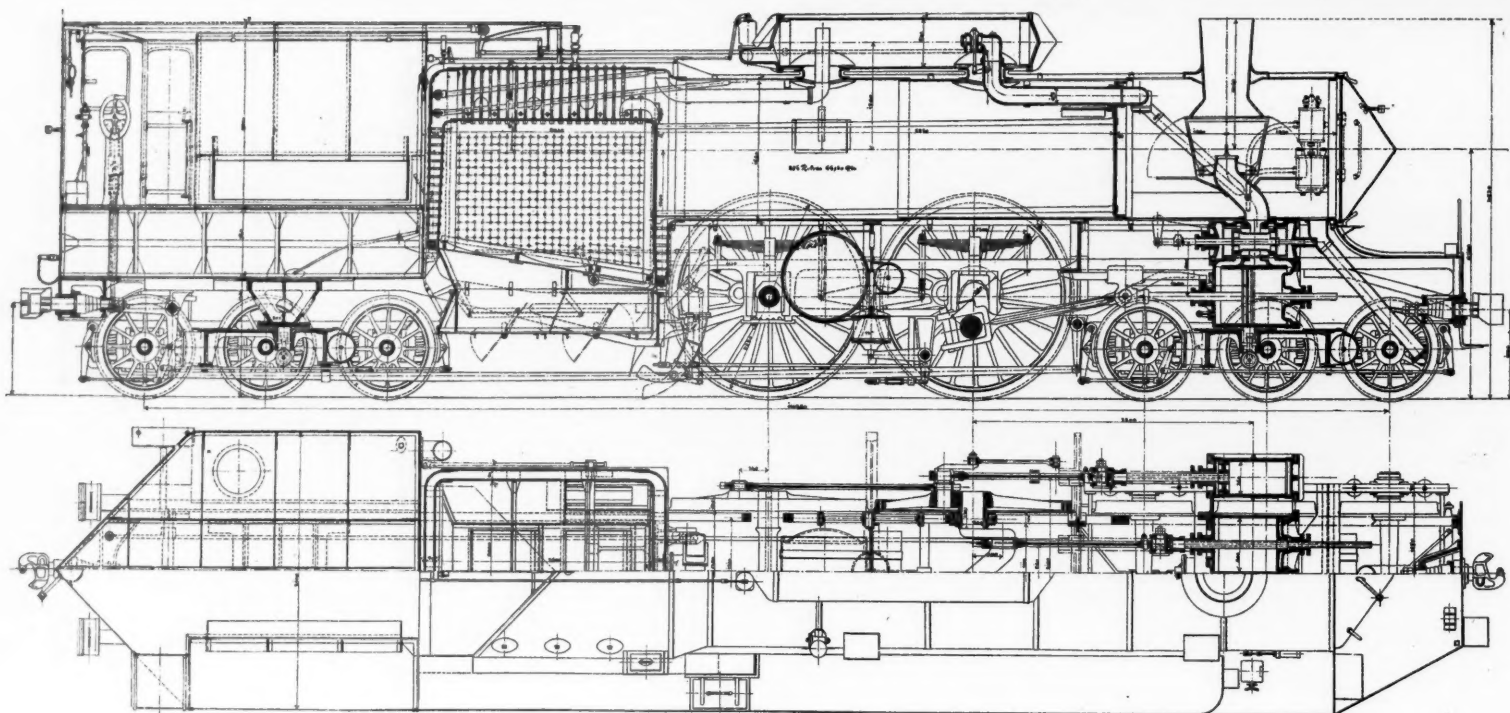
Four-Cylinder Balanced Compound Tank Engine—Designed by R. Avenmarg.
